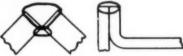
Flush corner joint. Fig. 10-Half-open corner joint.
